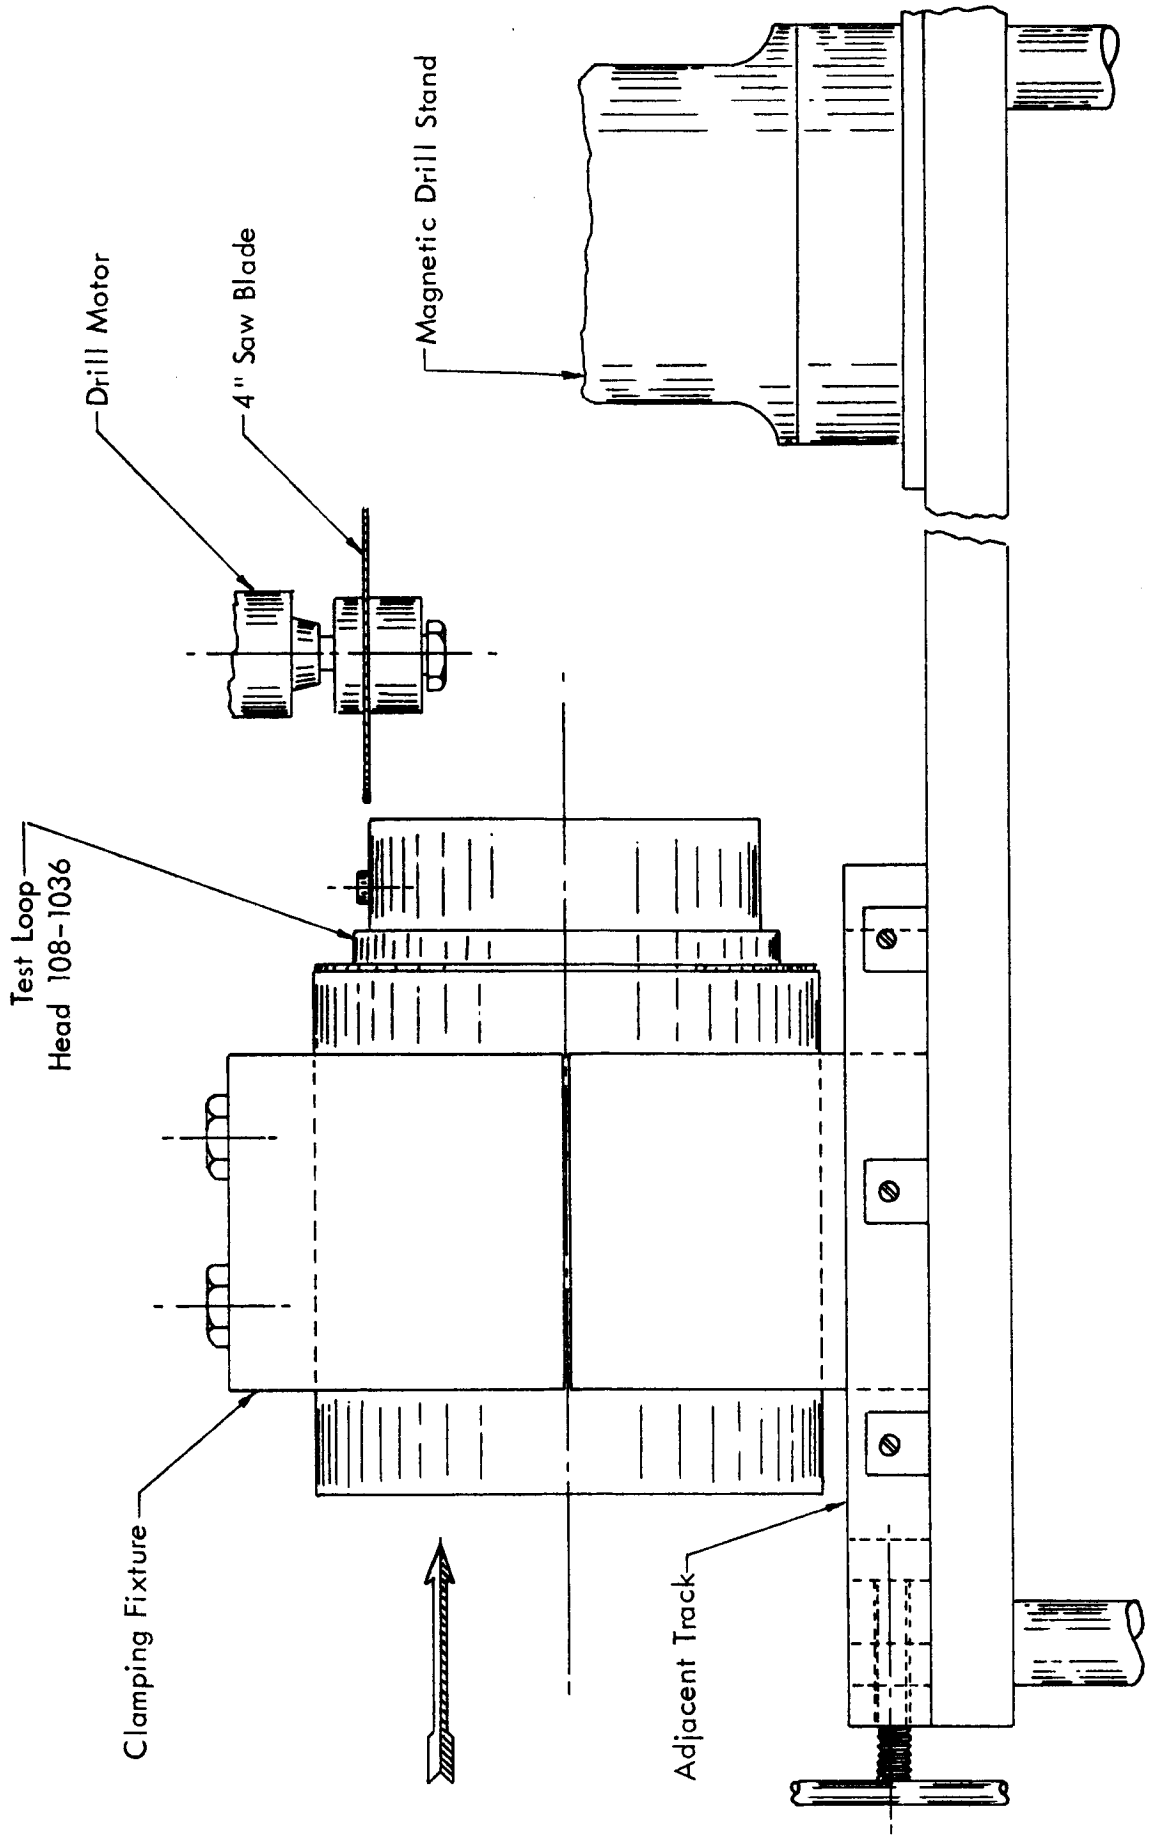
REMOTE HANDLING FIXTURES TEST LOOP HEAD EVACUATION TUBE CUT-OFF
